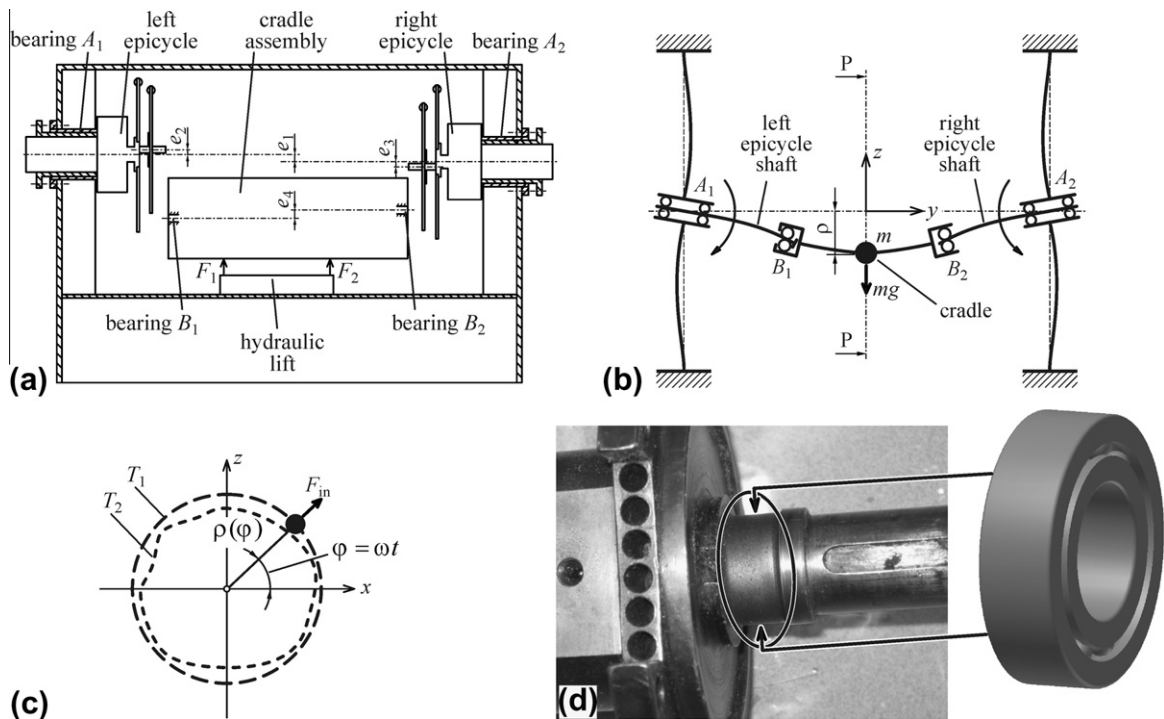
(a) Manufacturing errors. (b) Cradle position described by elastic lines. (c) Possible trajectories of cradle mass centres T1 and T2. (d) Photo of worn epicycle shaft journal.
